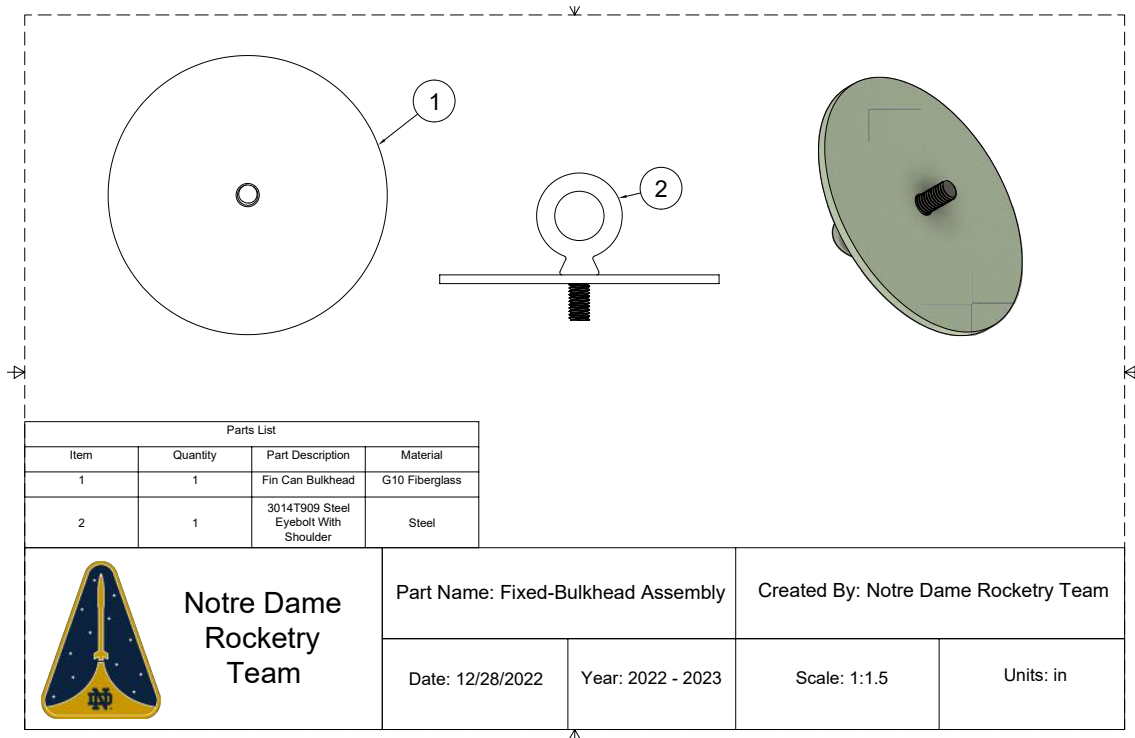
CAD Drawing of the Bulkhead-Eyebolt Assembly
